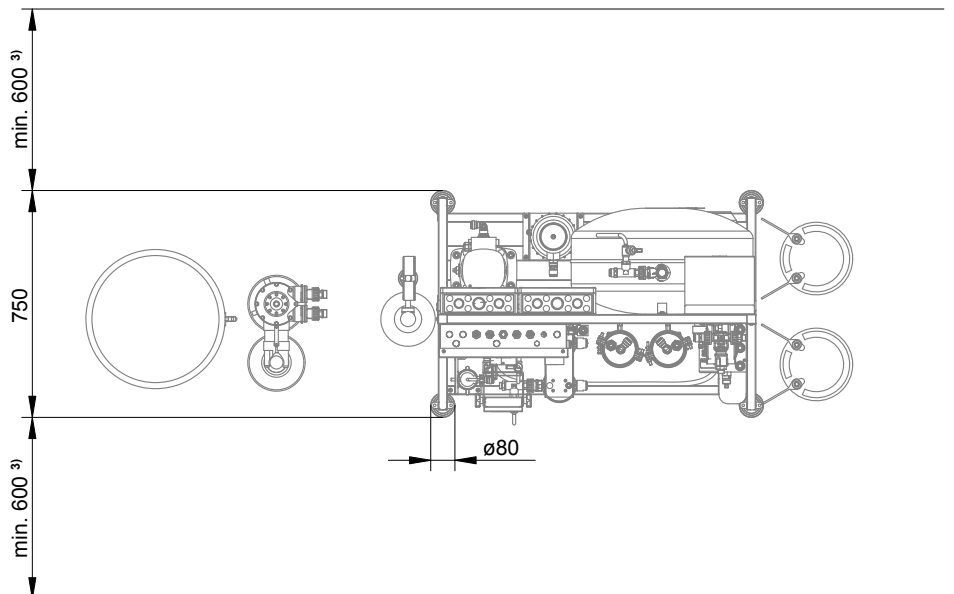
System dimensions Vita Power RO-DI-CO-UV-HP (dimensions in mm)
